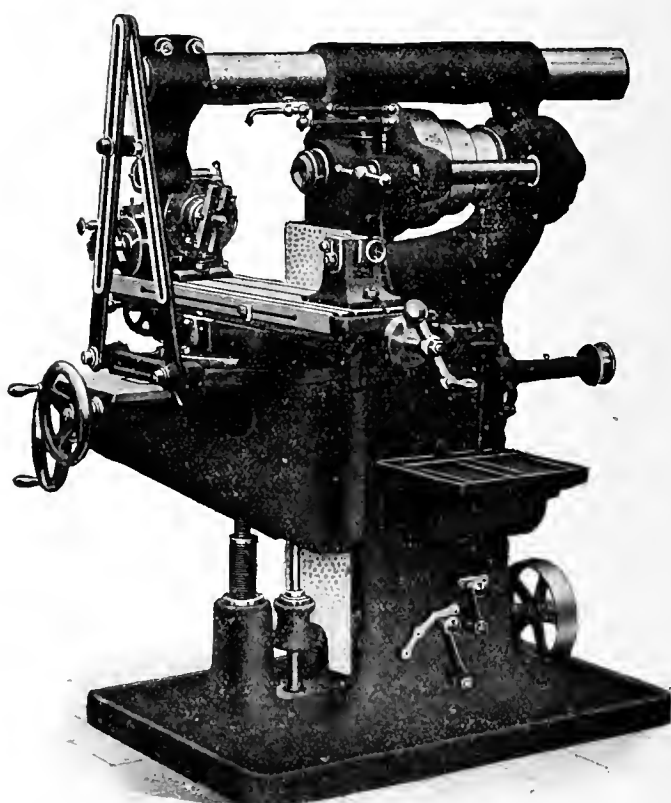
Universal Milling Machine built by the Wanderer Fahrradwerke.
